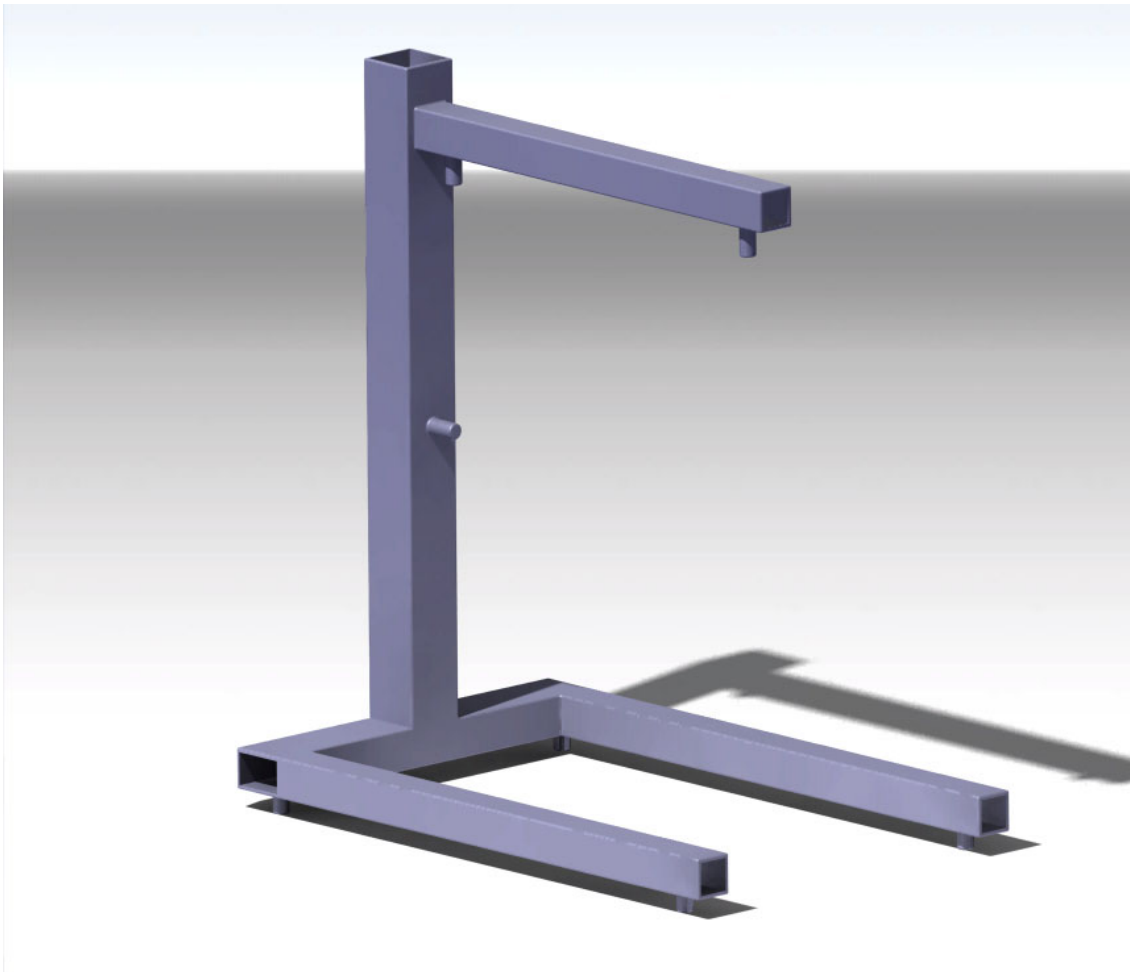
3D SKETCH FOR SECOND DESIGN OF FLOOR CRANES
